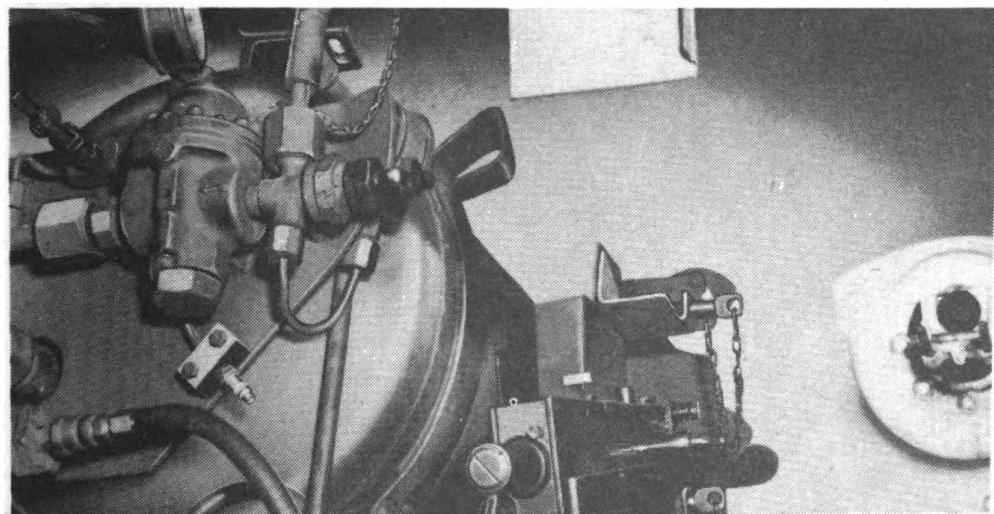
Transmission fuel group installed, and U-bracket welded to roof of vehicle.
